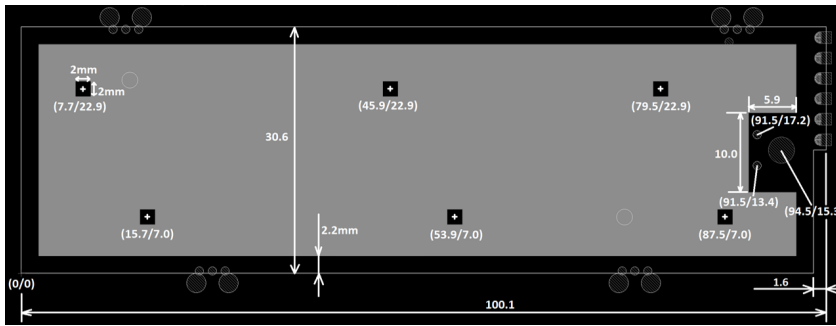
Position of solder stop mask on the bottom surface of the PCB (FEB8-2) with black frame and six single points. The solder mask used is 2 mm wide and the thickness of the solder mask and the single points was 35 μm .
